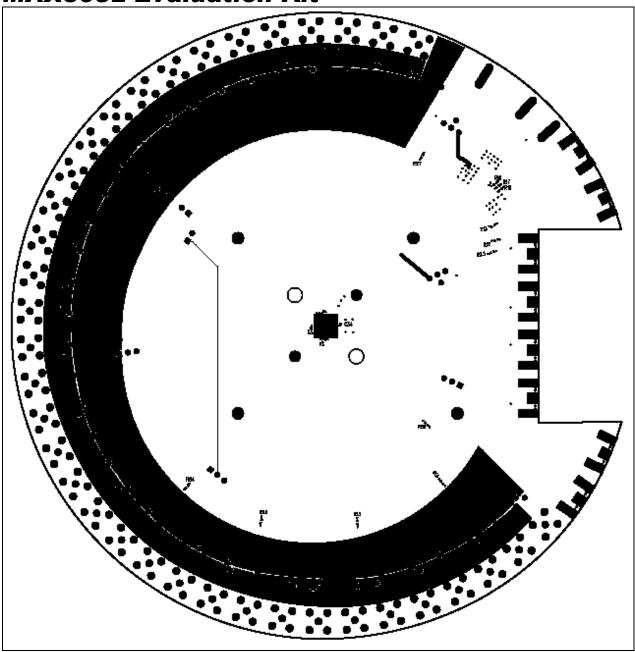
MAX3952 EV Kit PC Board Layout–Solder Side
